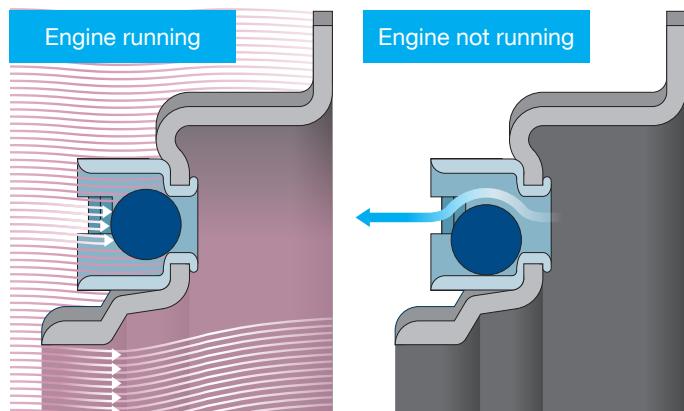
When the engine is running, the ball valve is closed by the flowing coolant.
